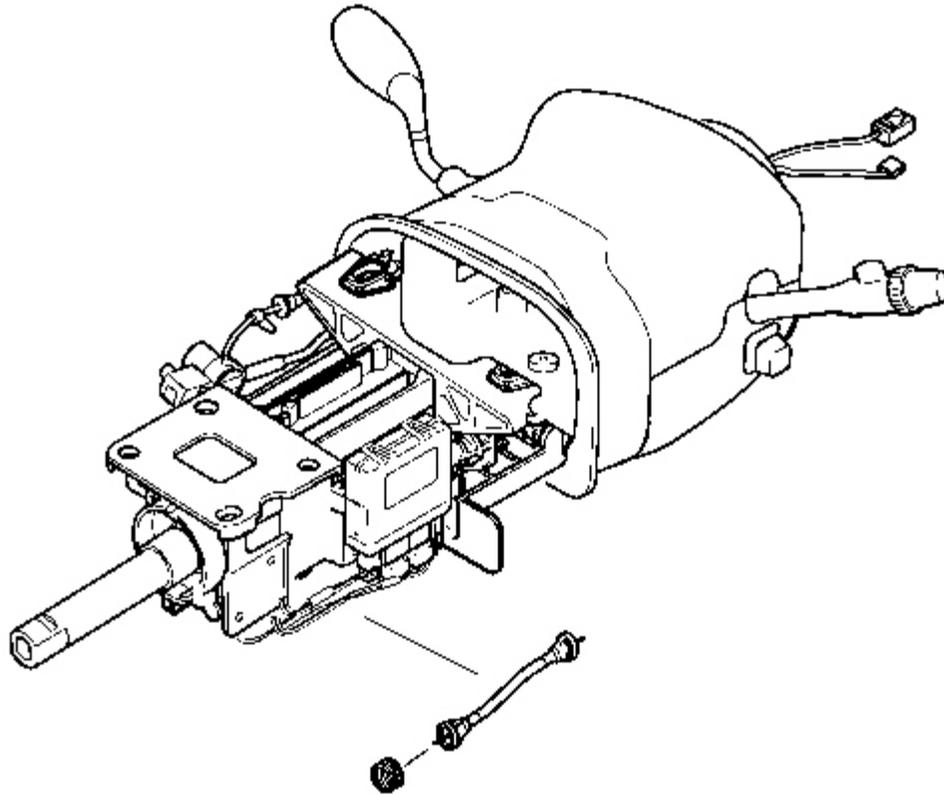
View Of Telescope Cable & Telescope Actuator Assembly
